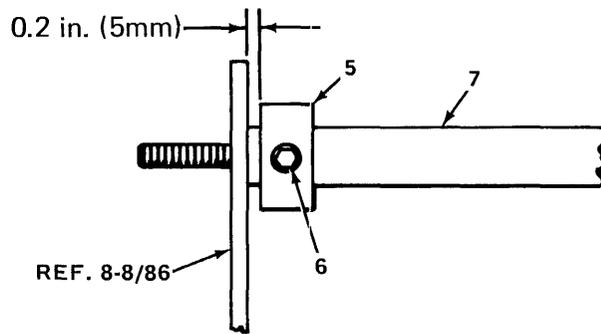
MAINTAINING 5/8-IN. (15.9 MM) NOMINAL PRINT MARGIN
